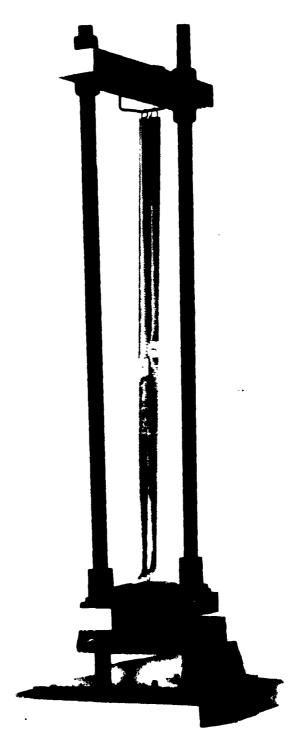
Apparatus used to position honeycomb specimens for chemically milling with gels. The wedge-shaped gel on the platform was used to produce the tapered specimen shown in Figure 9.
